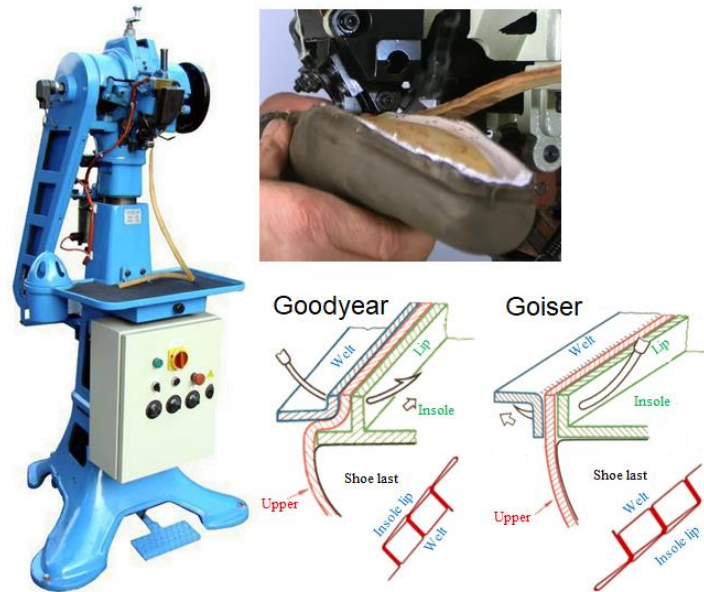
Welt stitching machine (Goodyear Welt Machinery n.d.)
